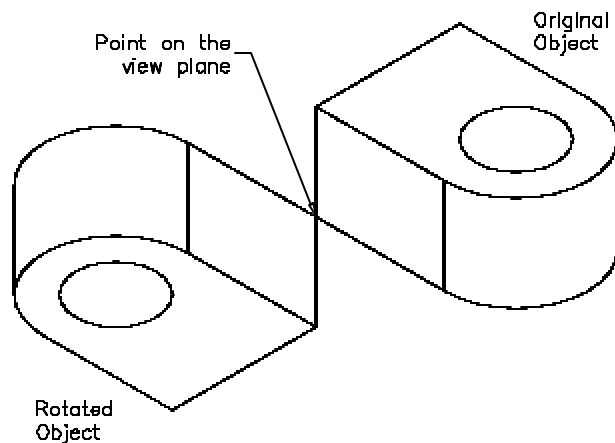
Rotating the solid model using the View option by an angle of 180 degrees
